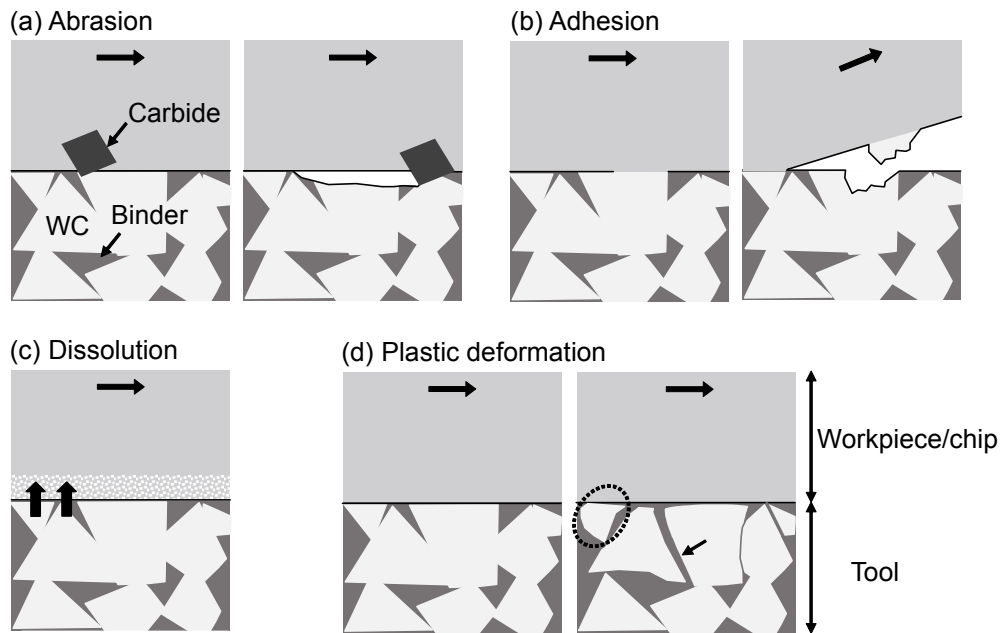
Examples of different tool wear mechanisms at the interface between tool and workpiece/ chip during metal cutting: (a) workpiece-carbide sliding against tool surface leading to removal of tool material; (b) localized adhesion between tool and workpiece followed by pull-out of tool material; (c) loss of tool material by chemical dissolution of its atoms into the workpiece/ chip; (d) plastic deformation of WC grains (example encircled) and of the carbide network by WC grain boundary sliding (see arrow for example).
